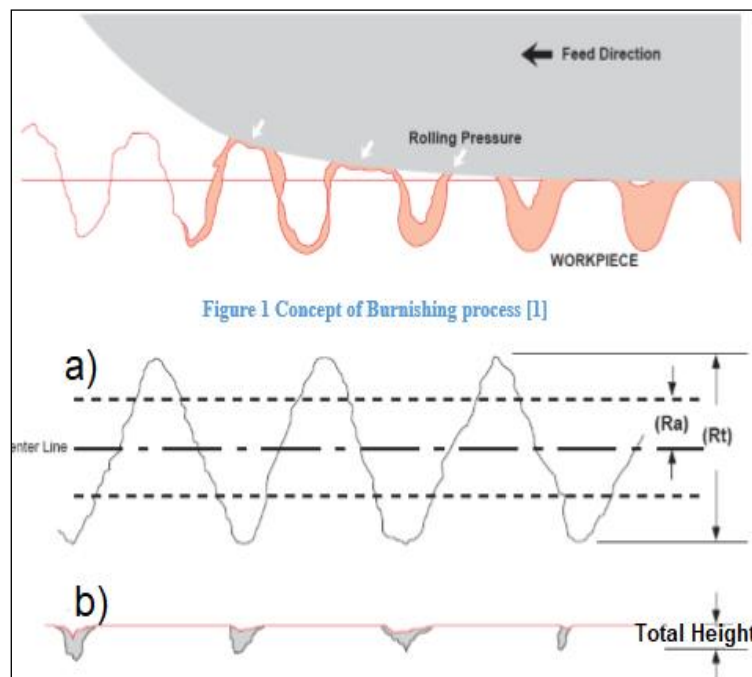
a) Before Burnishing Surface b) After Burnishing Surface.
